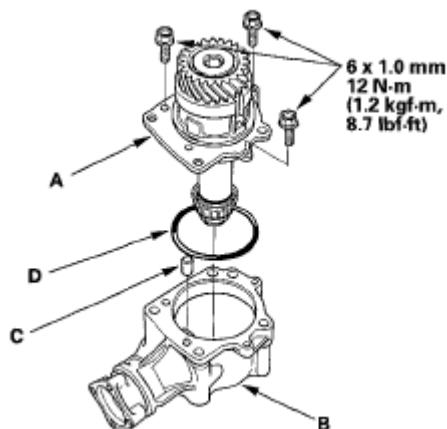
Identifying Transfer Holder Assembly, Transfer Housing, Dowel Pin And O-Ring With Torque Specification
